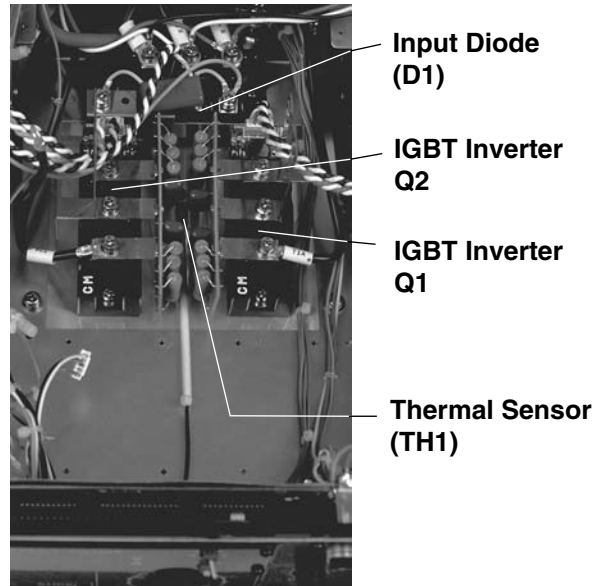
Top of power control assembly (shown in GMS model with main circuit board removed)
